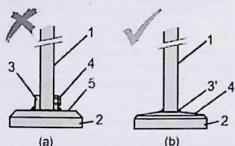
(a) Foot spindle (1) is inserted into a bush (3) which is welded to a foot base (2). The foot spindle is rigidly fastened to the foot base by means of a screw (4). This foot is not hygienically designed because the upper part of the foot base forms a non-drainable flat surface (5). Debris and water may collect into the crevice formed between the inner surface of the bush and the inserted part of the spindle, and around the fastening (4). (b) The foot spindle (1) is all-around flush welded (3') to the foot base (2) from which the upper surface parts (4') are now sloped to make them drainable (Hauser, 2008b).
